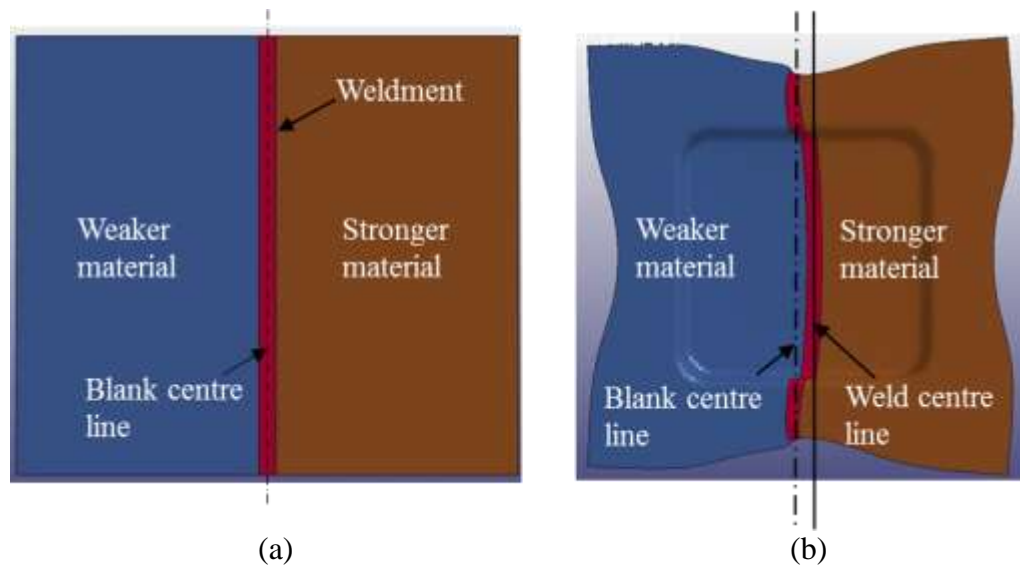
Weld line in TWB (a) Before stamping (b) After stamping
